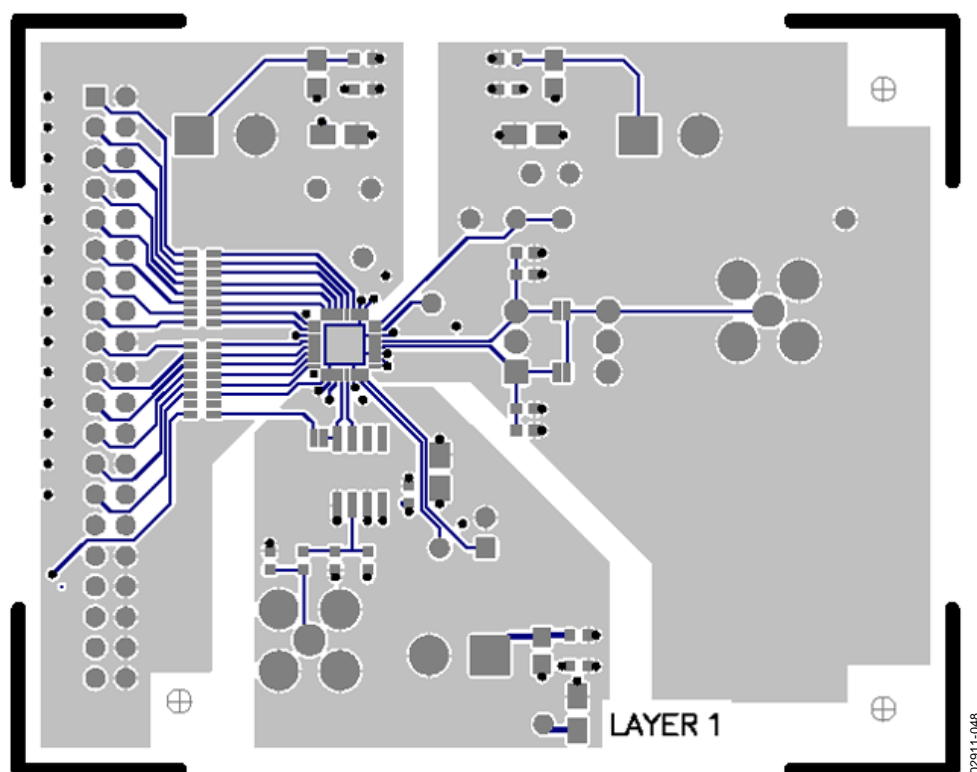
LFCSP Evaluation Board Layout—Primary Side
